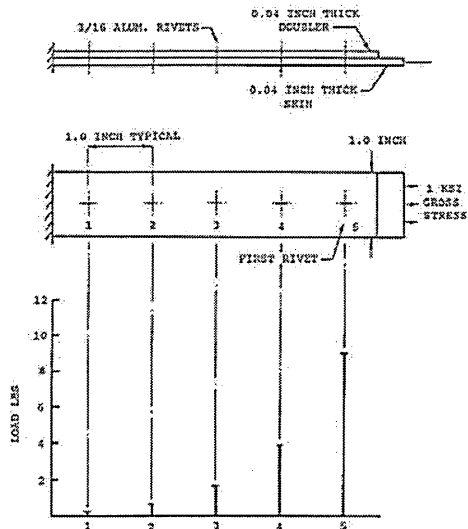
Example of Rivet Bearing Load Distribution (Reference 34)
